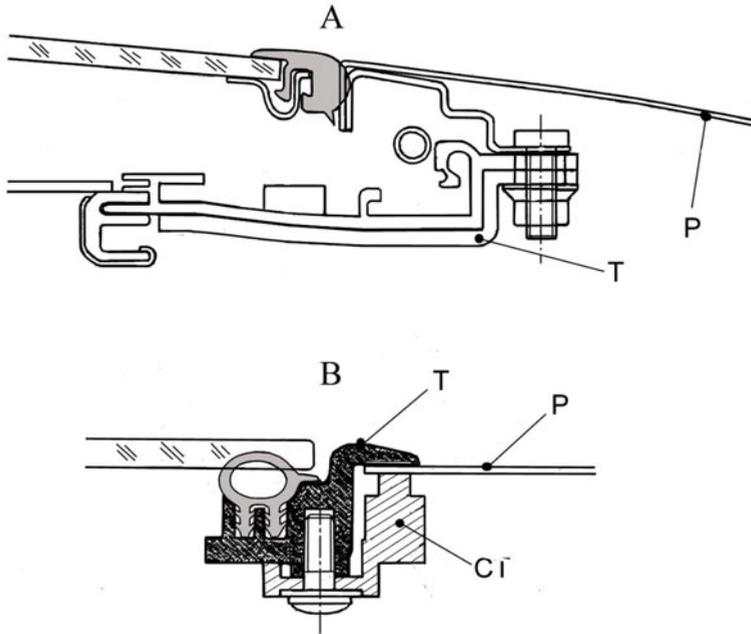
A: glass sunroof carrying the weather strip, the frame being screwed to roof P; B: glass sunroof with weather strip fitted to frame T, screwed to an auxiliary frame CT with the roof panel P in between.
